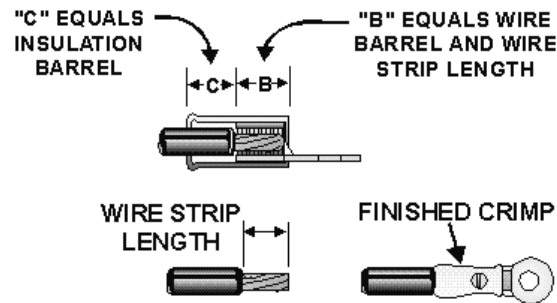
Proper insertion of stripped wire in insulation terminal lug for crimping.
